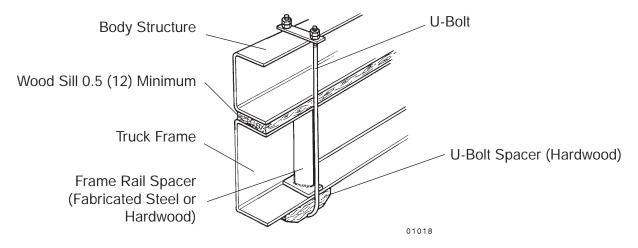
Acceptable U-Bolt Mounting with Wood and Fabricated Spacers [inch (mm)]
